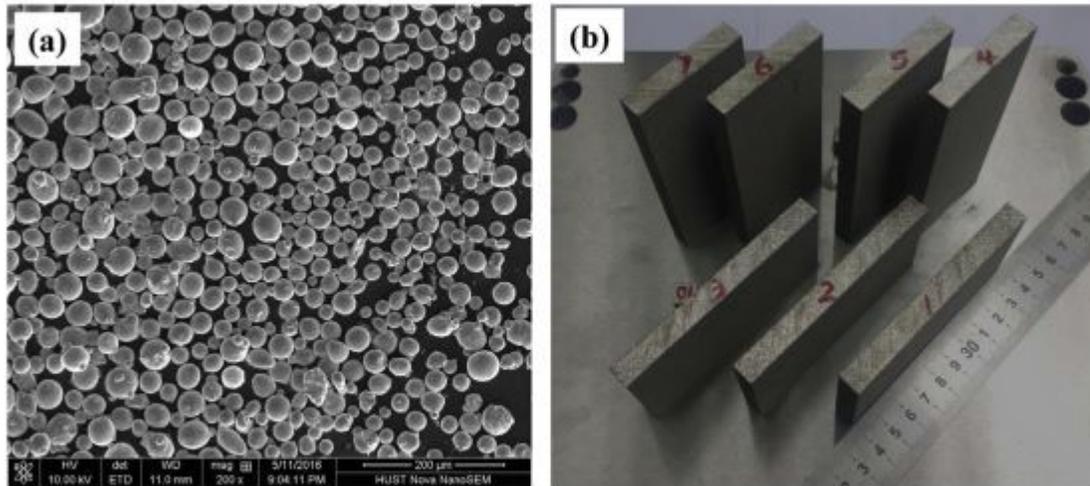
Morphology of metal powders (a) and macro-morphology of SLMed plates (b) of 304 stainless steel.
